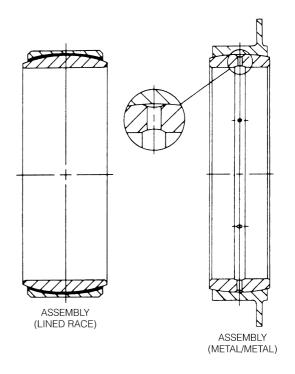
SNAP-ASSEMBLED BEARINGS
